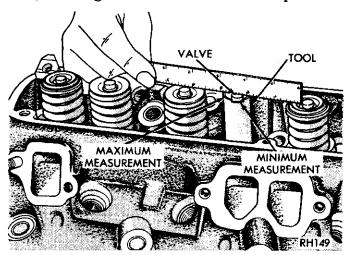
Measuring Valve Stem Length with Tool C-396B
